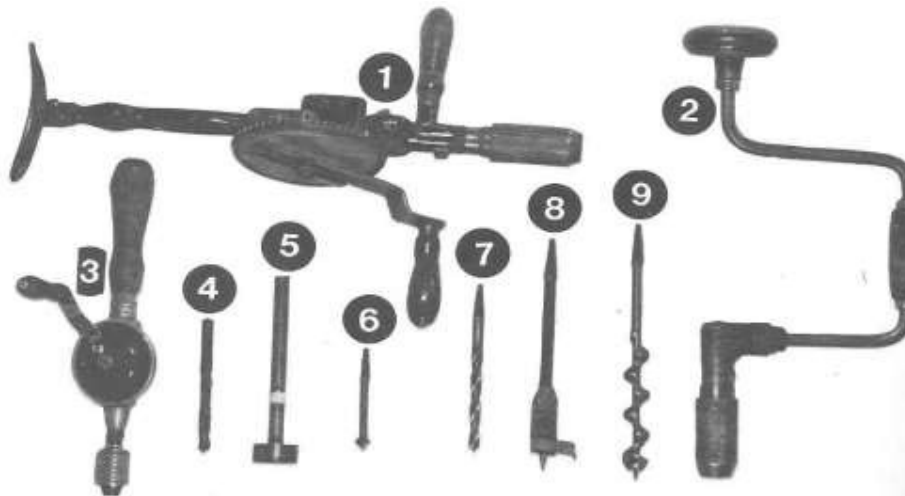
Wood boring tools: 1. Breast hand drill. 2. Ratchet bit brace. 3. Hand drill. 4. Straight shank twist drill. 5. Straight shank Forstner bit. 6. Bit stock countersink bit. 7. Bit stock twist drill. 8. Expansive bit stock auger bit. 9. Bit stock auger bit.
